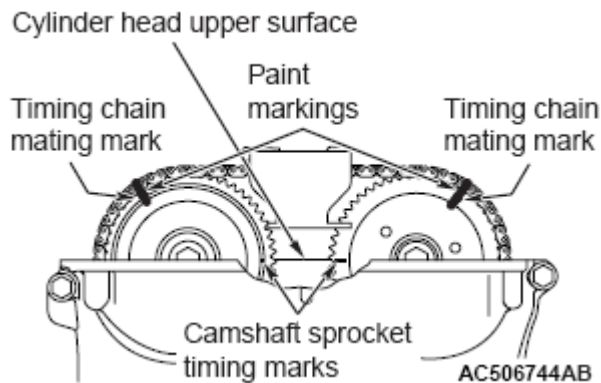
Identifying Paint Marks On Camshaft Sprocket And Valve Timing Chain
